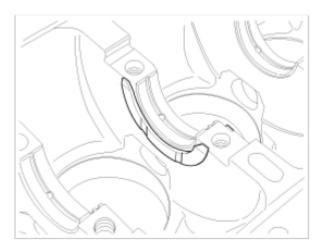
Identifying Thrust Bearing Courtesy of HYUNDAI MOTOR AMERICA
